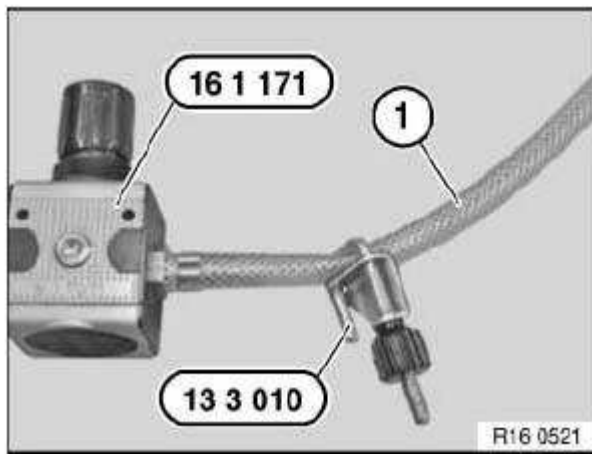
Fuel Filler Neck Delivery Line, Special Tools (16 1 171) And (13 3 010)
